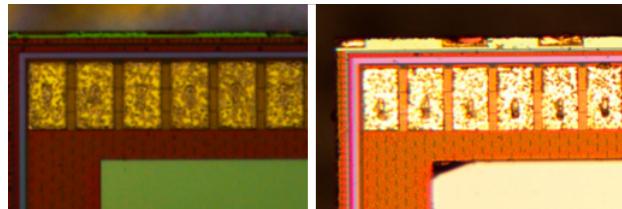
Replating of extracted die. With extracted die plating, pads become once again wire bondable with good adhesion, allowing depackaged die to be reused.
